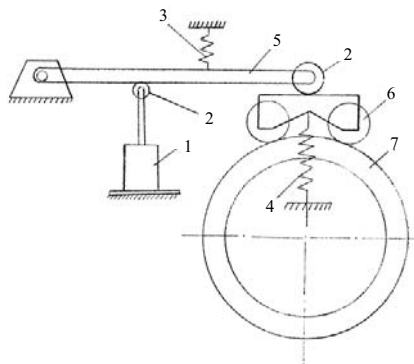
The scheme for measure the thickness of roll pressing mats: 1 - sensor of displacement; 2 - ball-bearings; 3 - lever pressing spring; 4 - roll pressing spring; 5 - lever; 6 - satellite roll pair; 7 - central roll.
